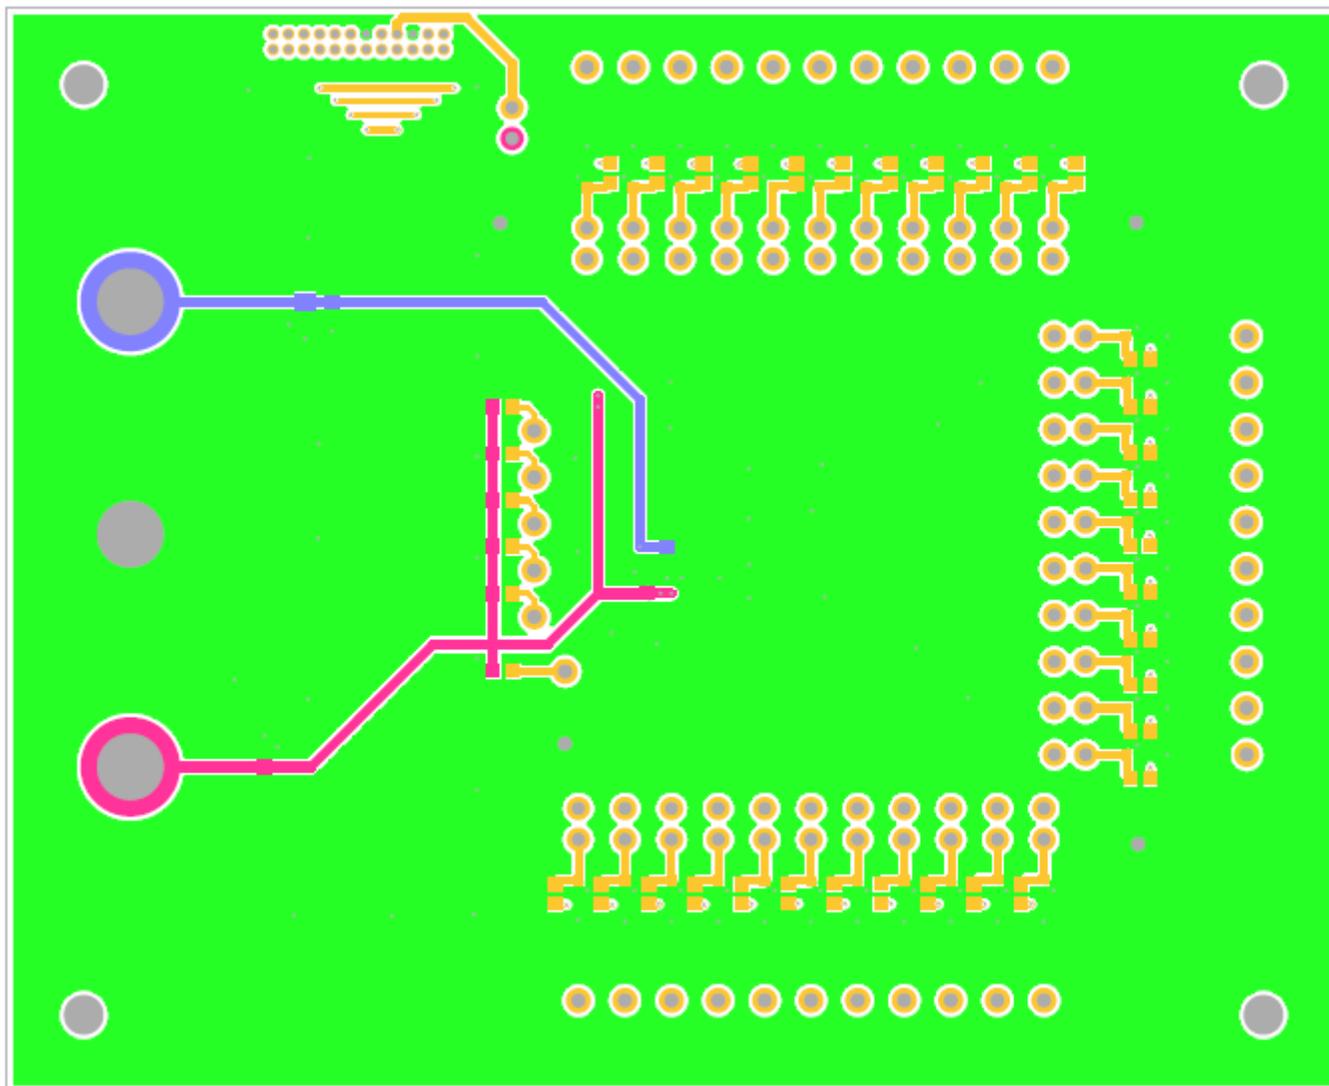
BOTTOM LAYER SOLDER SIDE
